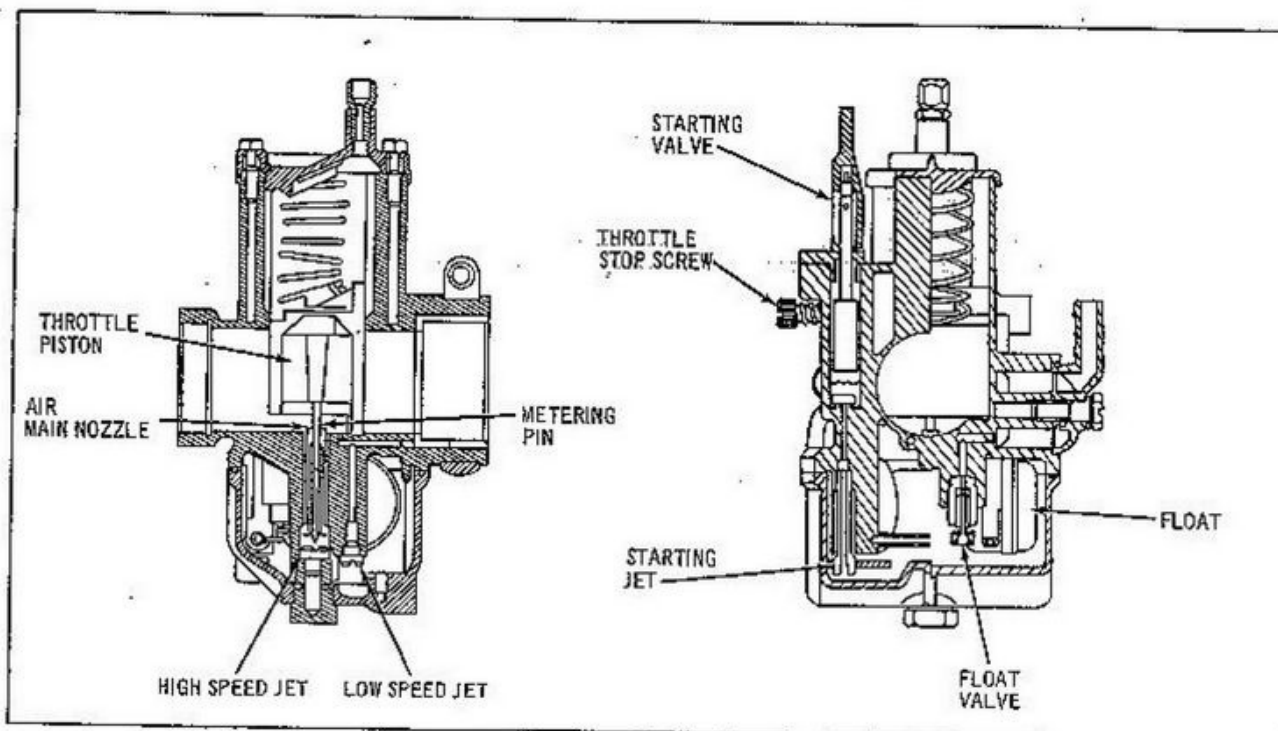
F-28A. Cross Section of Carburetor (1969 & Later)
